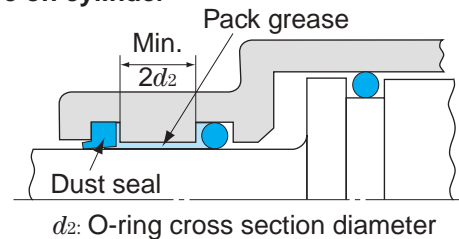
Typical installation of O-ring for dynamic sealing
